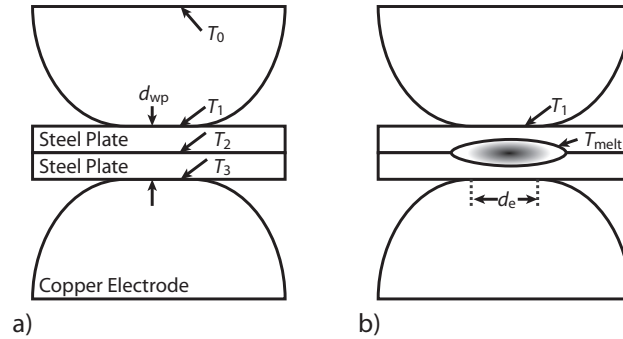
a) Initial welding stack prior to melting of two plates with workpiece thickness d_{wp} . b) Welding stack with a molten nugget interface temperature T_{melt} .
